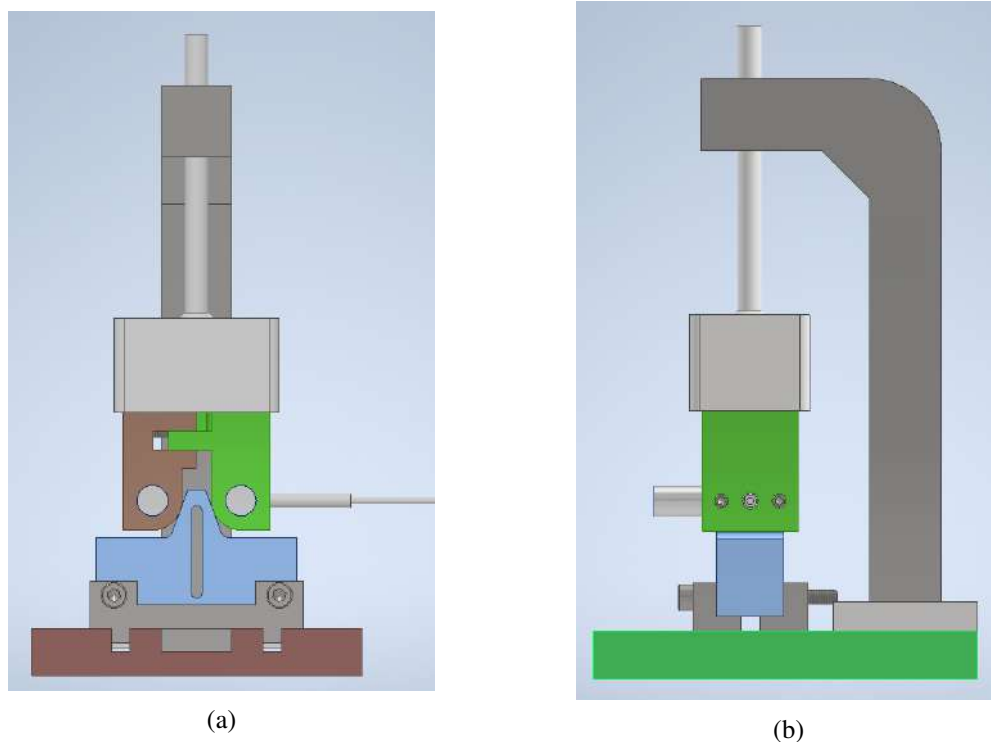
First design with tooth fixed to table support and heater on top: (a) front view and (b) side view.
